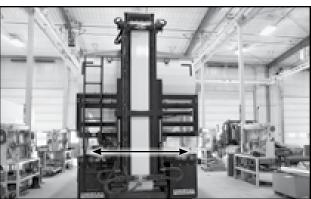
Folding Conveyor Shuttle Movement, CST-1500
